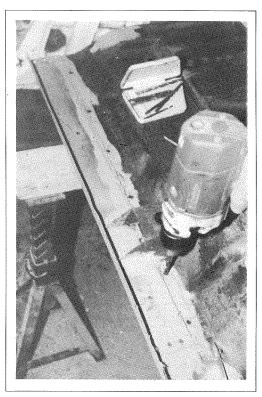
Jumping ahead a few weeks (when the body had been removed and turned upside down), the replacement floor edge was seam welded and then drilled for plug welding. This could just as easily have been done from the top before removing the body but a little more effort in dressing back the weld would have been required before fitting the top panel.
